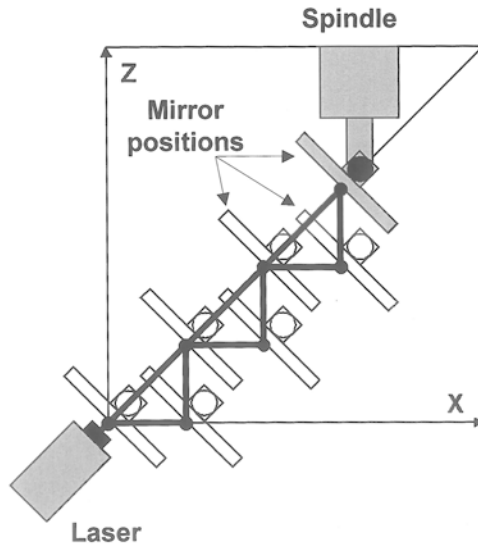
Typical laser diagonal tests for orthogonal machine tools (courtesy of Renishaw plc)
